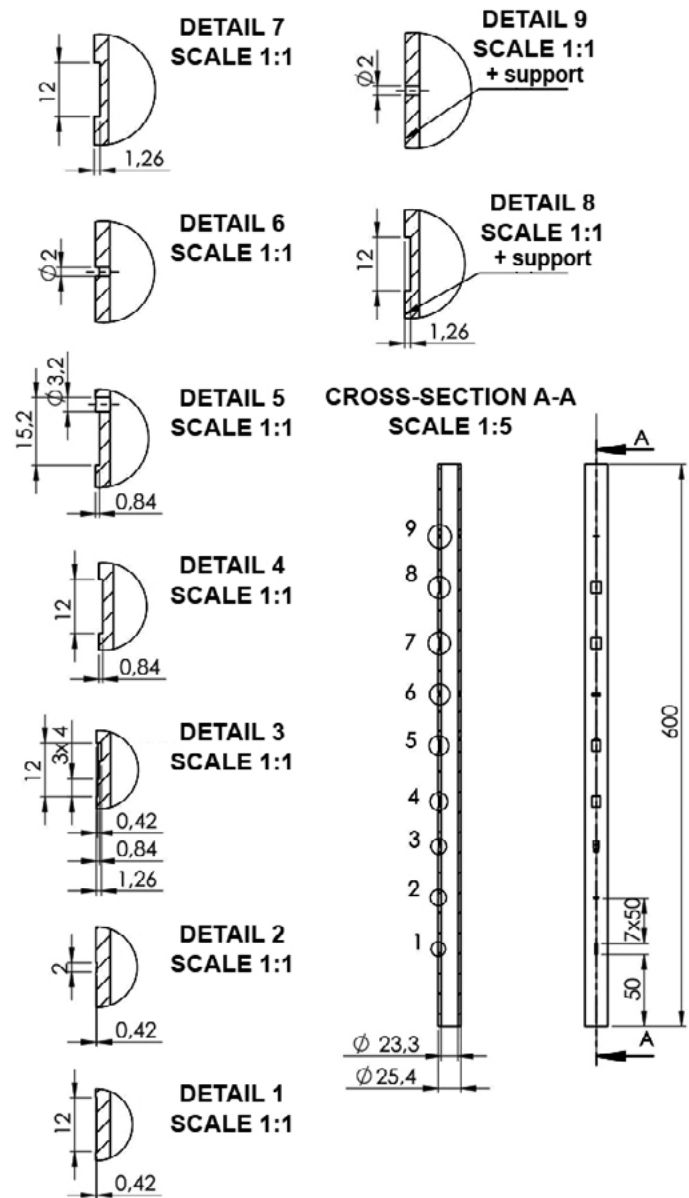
Production drawing of the tube containing non-standard defects
